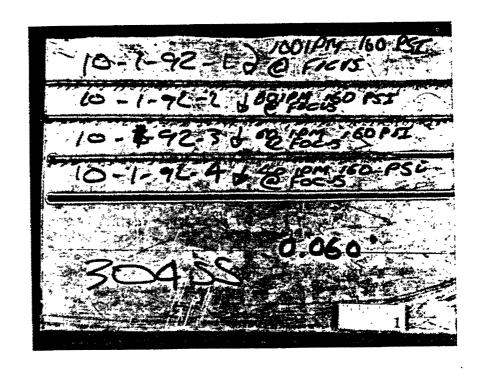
304SS 0.06 in. Thick Samples 10-1-92-1, 2, 3
